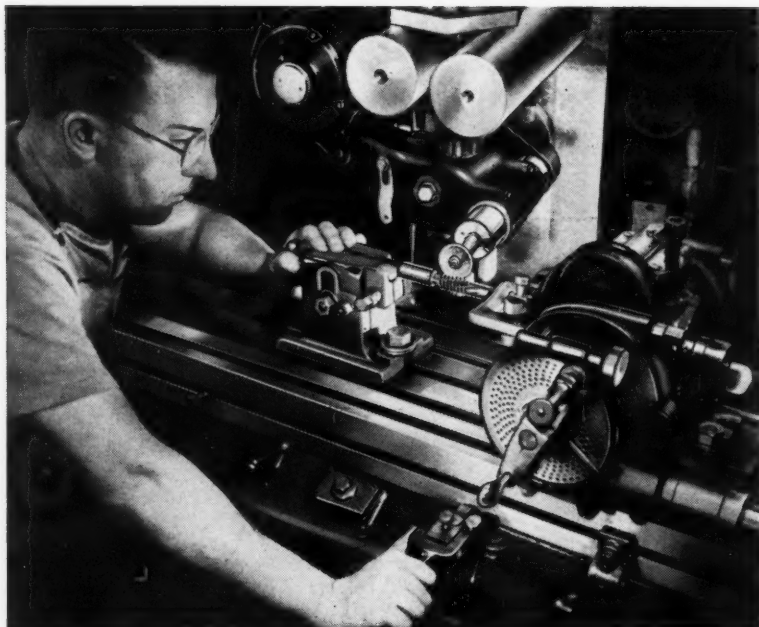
An indexing head may be used with a toolpost grinder on a milling machine for grinding hobs
